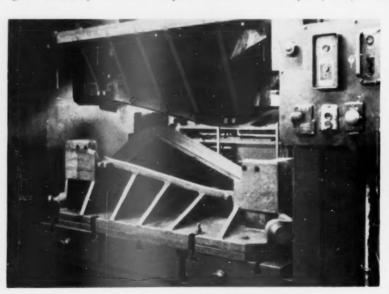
Drawing tool for the Dyna Panhard half-bonnet
